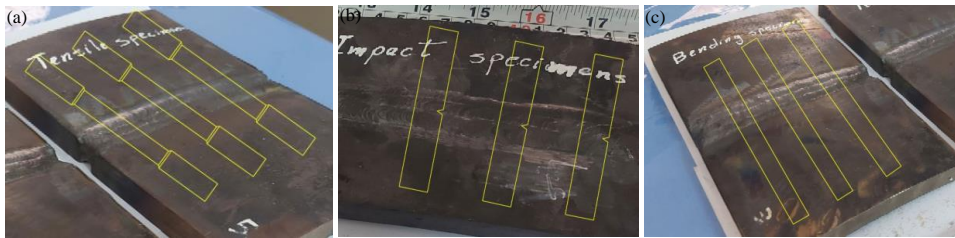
Locations of tensile, impact, and bending test specimens taken after butt TIG arc welding process (a) Tensile test specimens, (b) Impact test specimens (c) Bending test specimens
